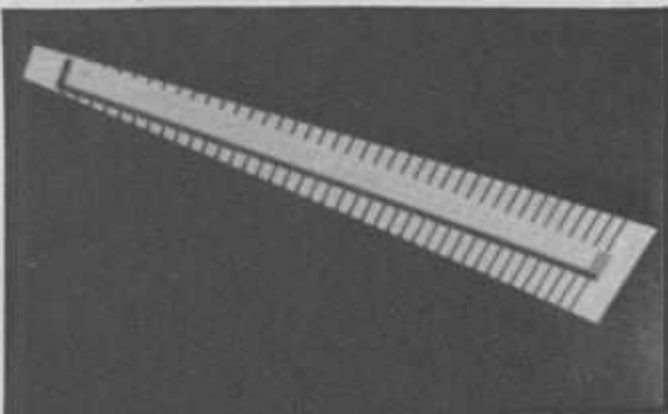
A lead bender helps you align component leads to circuit board holes and bend them properly.
